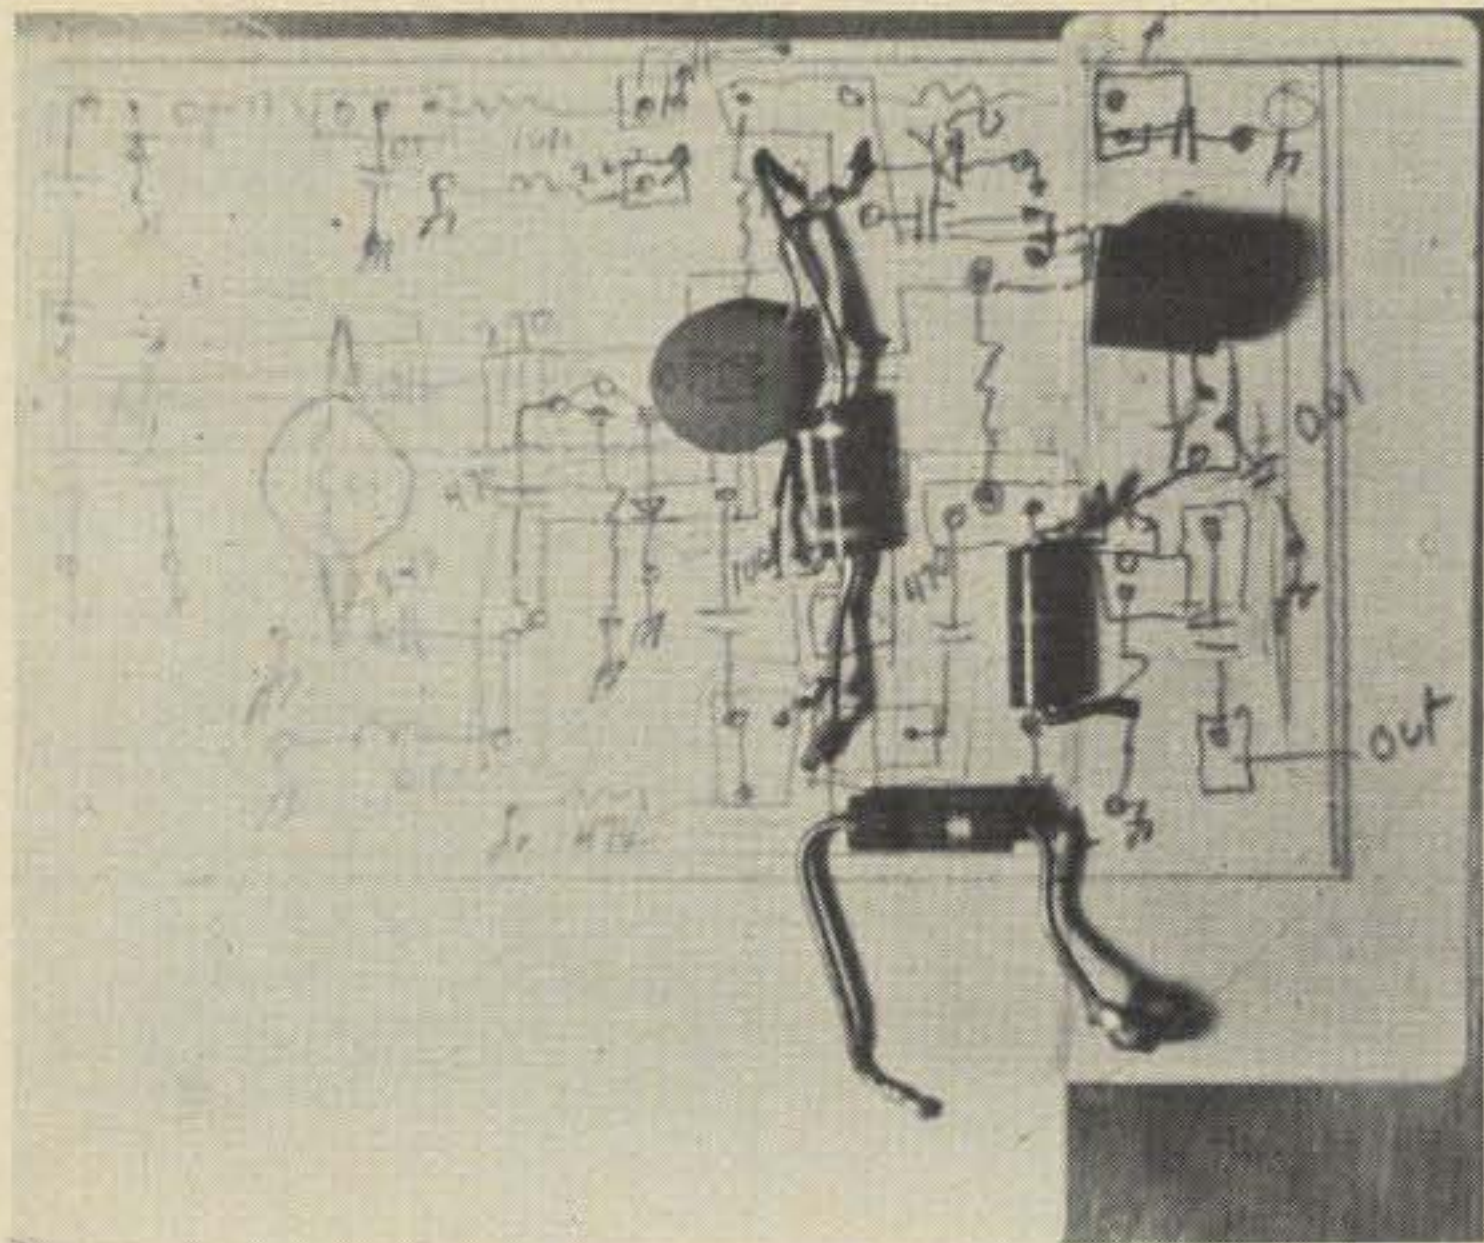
P.c. board stock has been covered with address label material, with seams firmly rubbed down to insure good contact along edges with the copper foil. Actual size parts have been laid out on the board and connection spots marked, with schematic symbols of parts drawn on in pencil.
